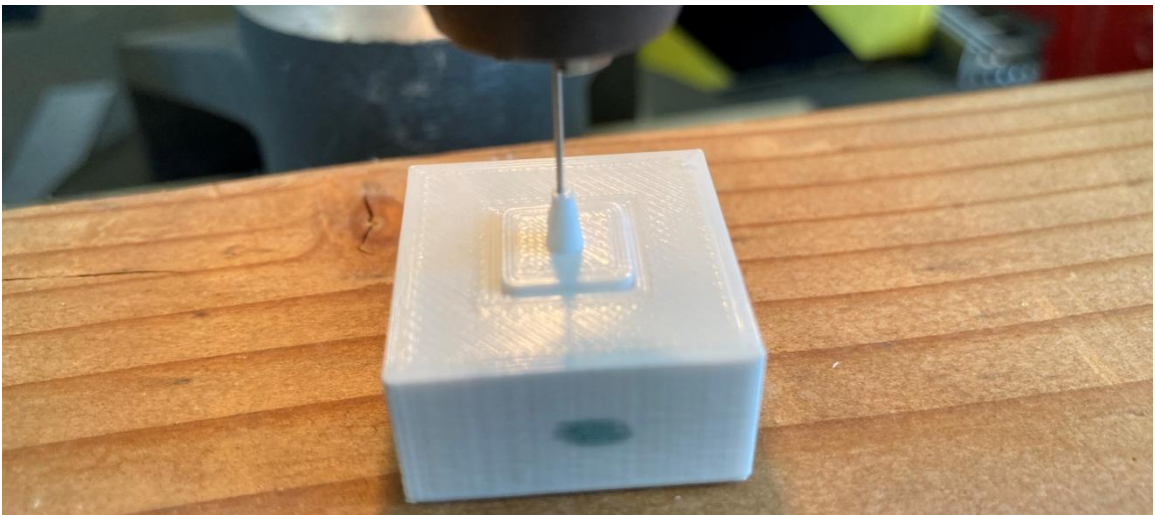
Drilling the Central Through Hole in the Plastic Adapter Body Using a Custom Made Jig to Keep the Part Secured in Place and Aligned with the Drill Press.
